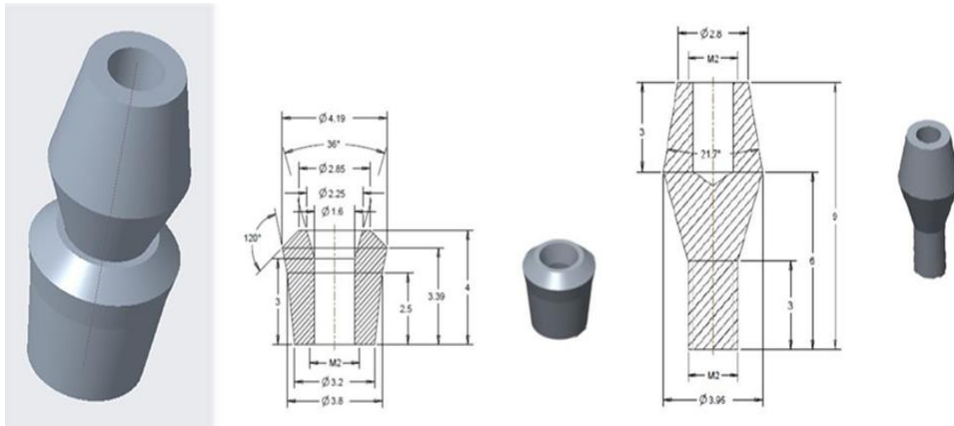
Dual-phase threaded pillar and its supplementary parts (threaded sleeve, threaded bodywork)
